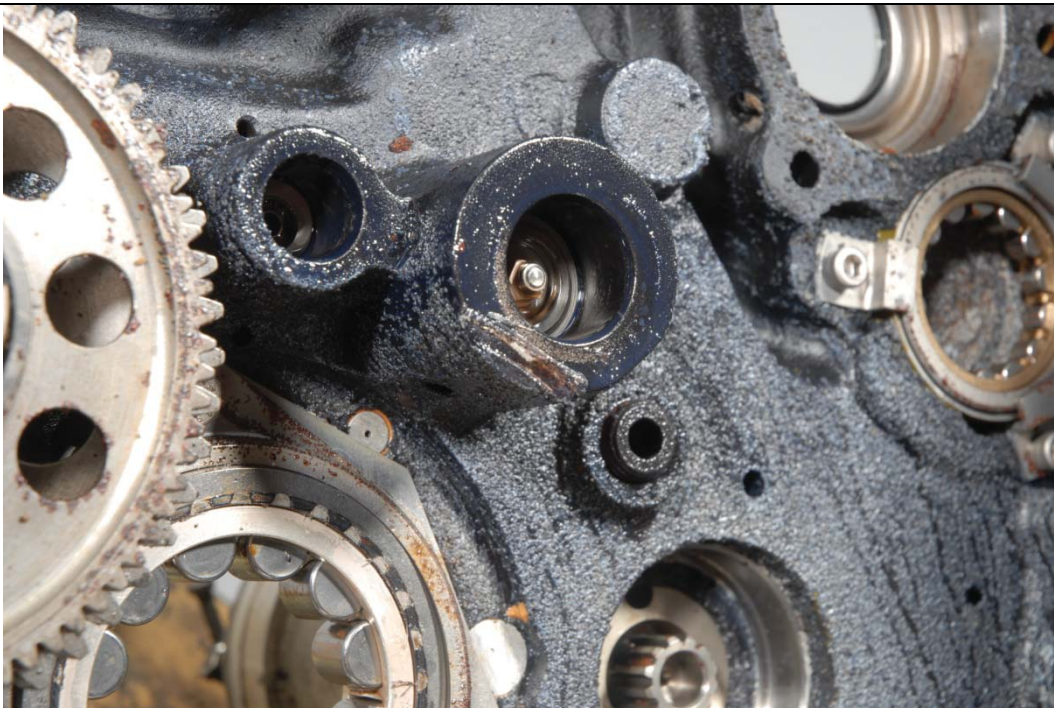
P-79297C, Starter/Generator Idler Gear Assembly
